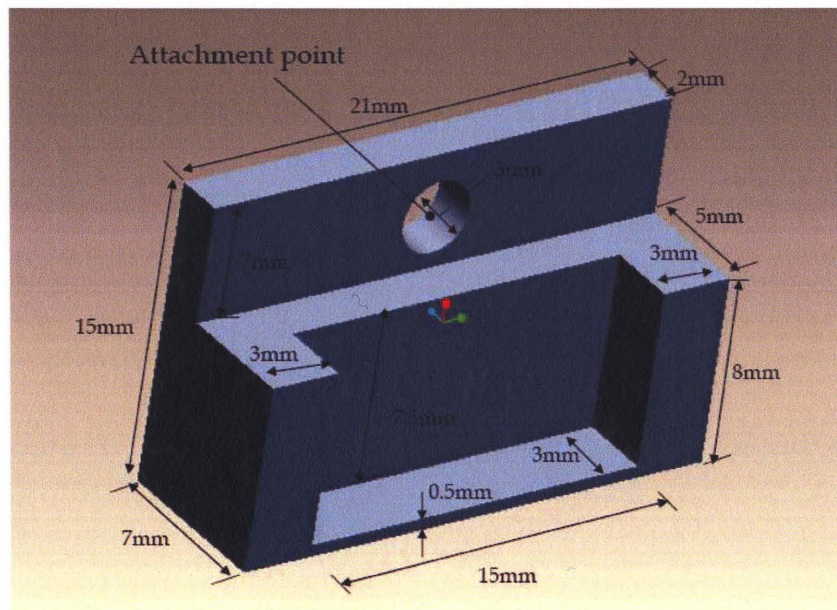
CAD drawing of the attached 3D component. Dimensions of the attached component.
